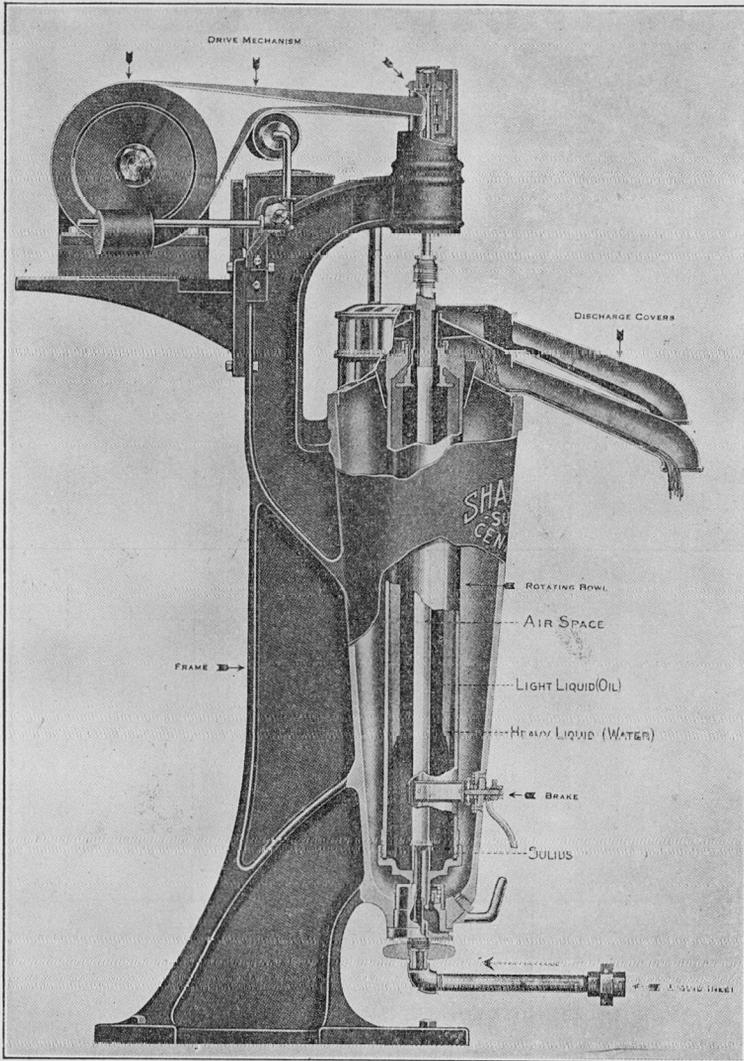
SECTIONAL FLOW VIEW OF SHARPLES SUPER CENTRIFUGE
